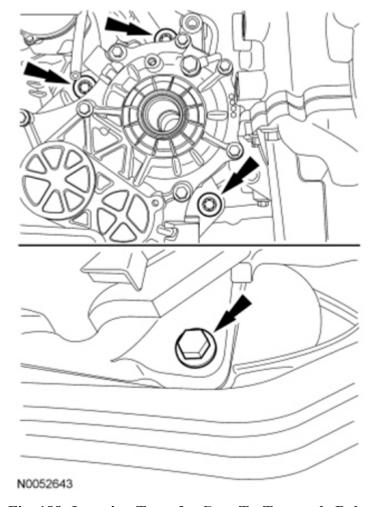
Locating Transfer Case-To-Transaxle Bolts
